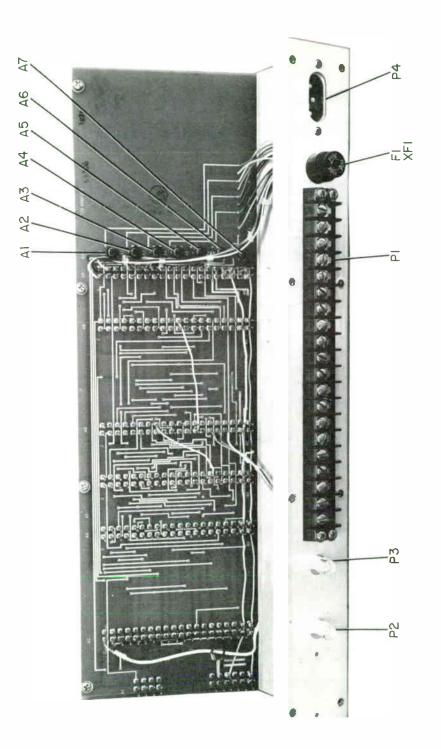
Lampdriver Board (Sheet 2 of 2).
